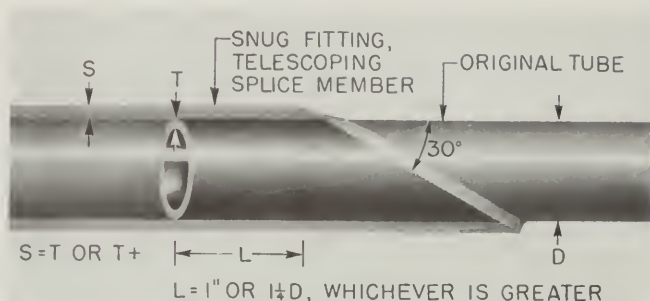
Steel Tube Diagonal Splice Using Larger Diameter Replacement Tube
